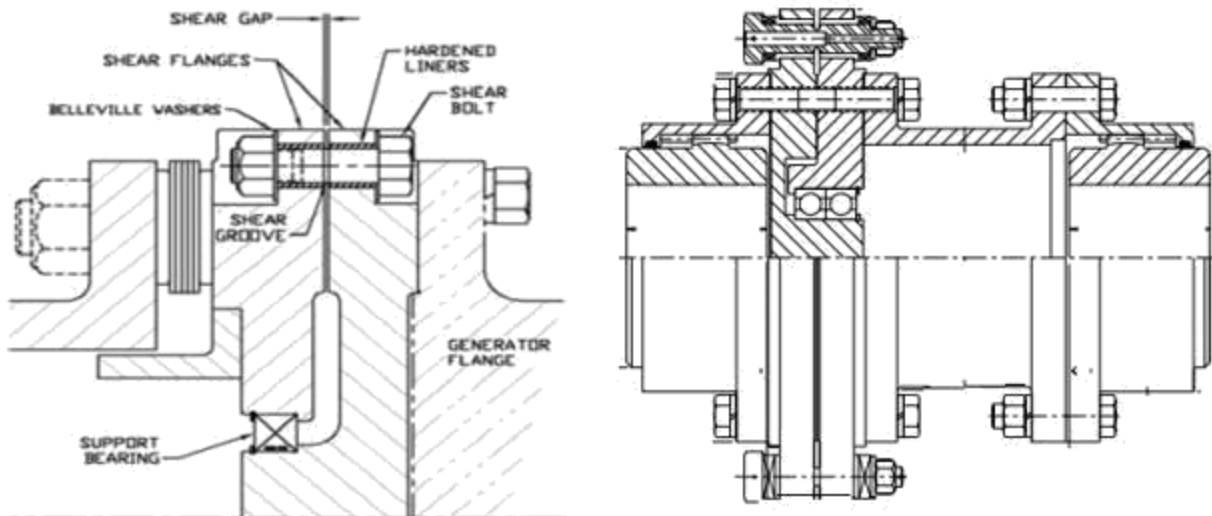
Shear pin type coupling with support / Ball bearing design (courtesy Ameridrive left & Kopflex right)
